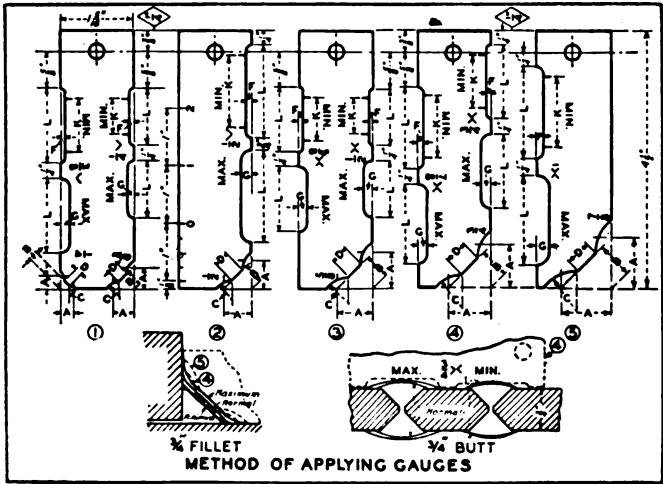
(upper)—Gauges for fillet and butt-welds.
